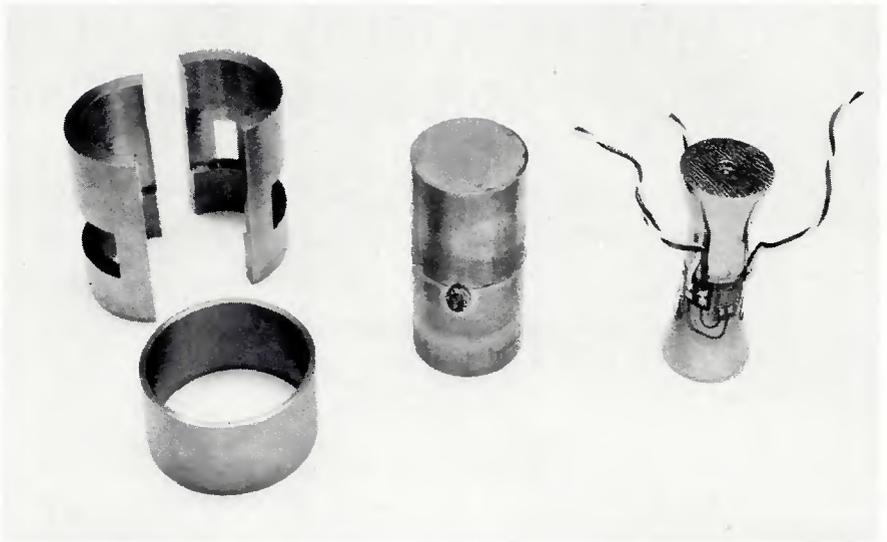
Braze fixture, brazed Be cylinders showing Al extrusion, and prepared tensile specimen
